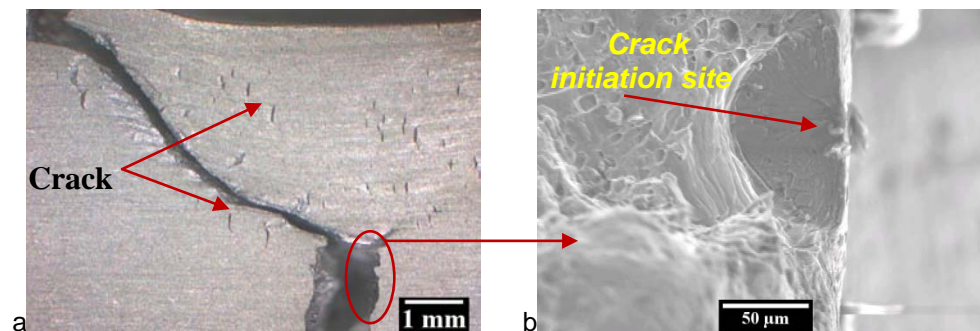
Failure of Al6061-T651, a) fractured specimen and b) crack initiation site
